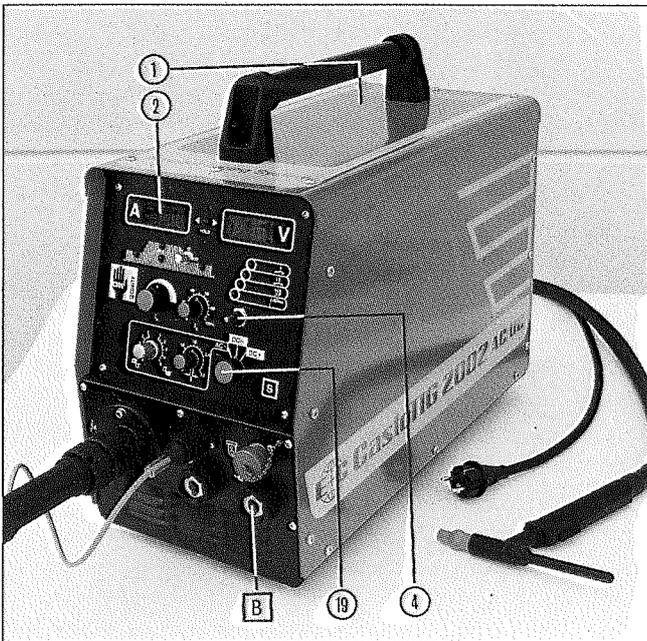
CastoTig 2002 AC/DC welding machine consisting of: Power source and manual torch.
